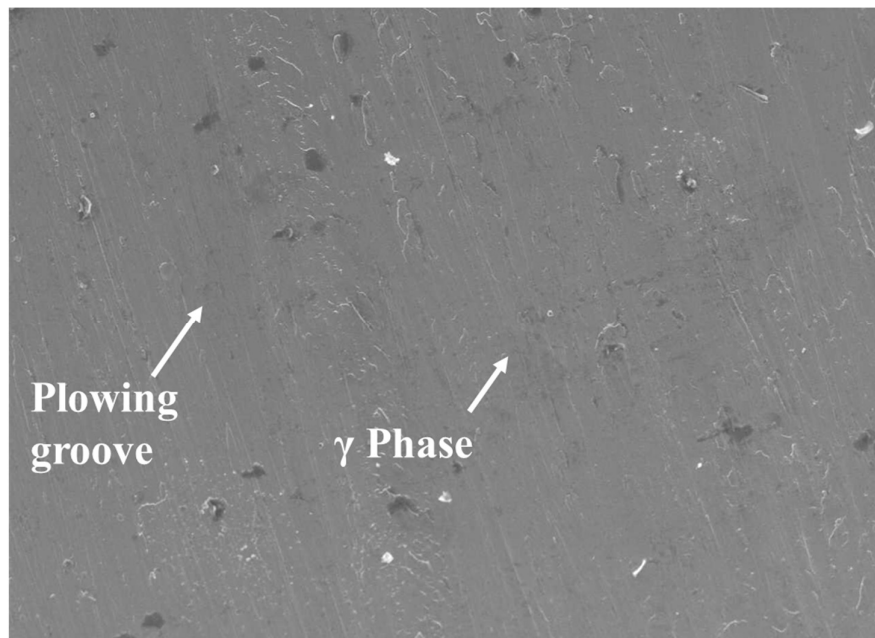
SEM image of Inconel 718 specimen at 1100 rpm drilled hole surface using LN₂ as coolant
